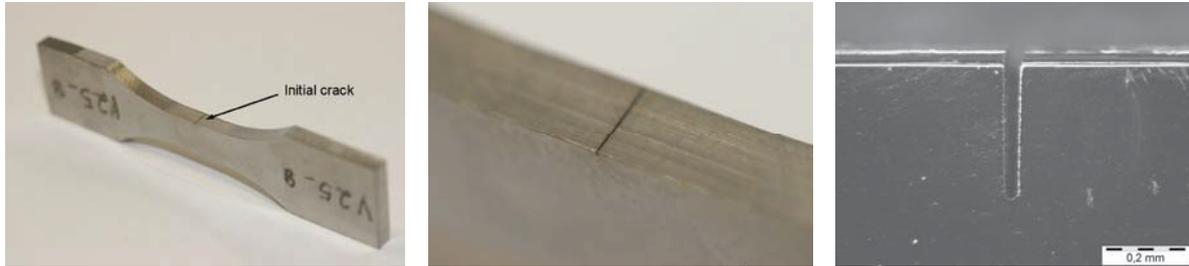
Position of the initial crack on the flat specimen (l, c) and LOM picture of an initial crack (r)
